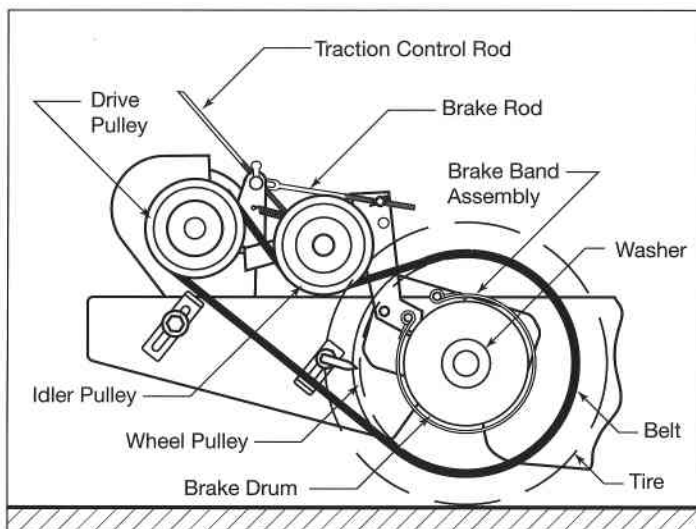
Right Wheel Drive Clutch/Brake Assembly in Brake Position (Fender Removed)
